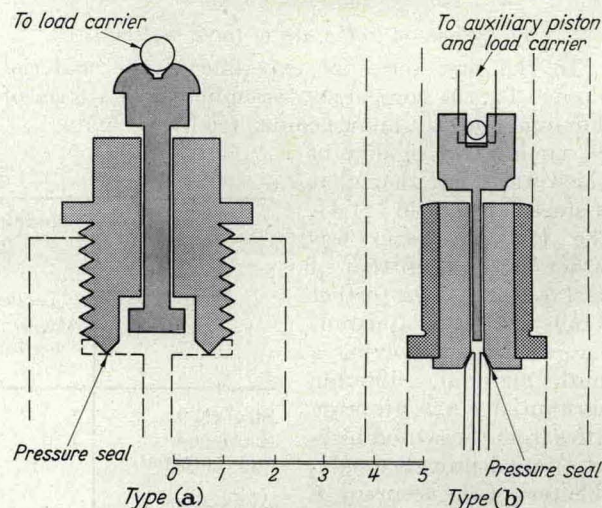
Diagrams of piston-cylinder assemblies (Scale of cm)
